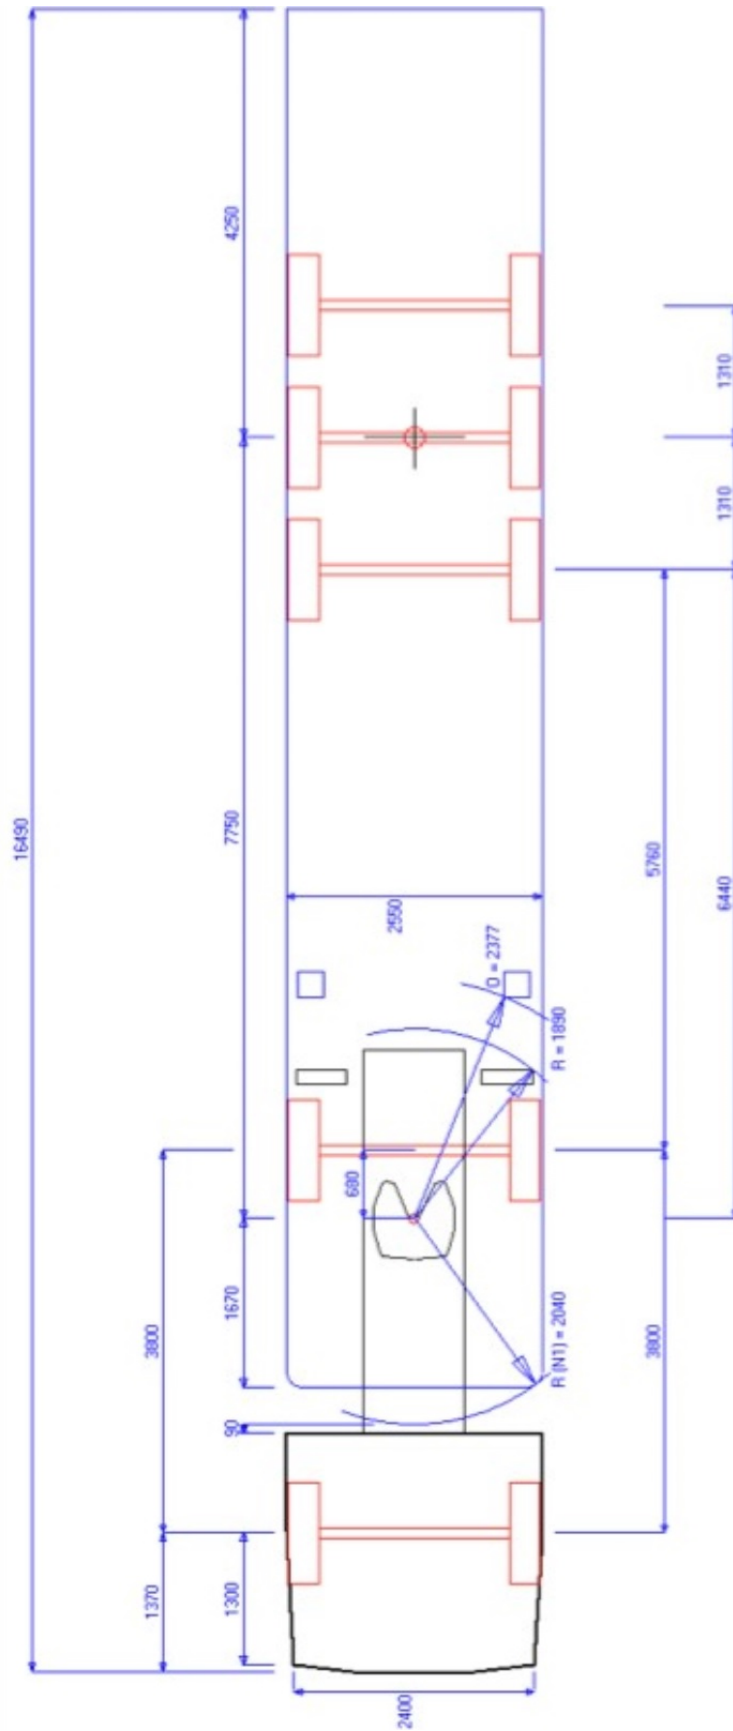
Dimensions of 5 axle tractor semi-trailer
